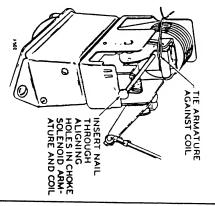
SISSON CHOKE ADJUSTMENTS
